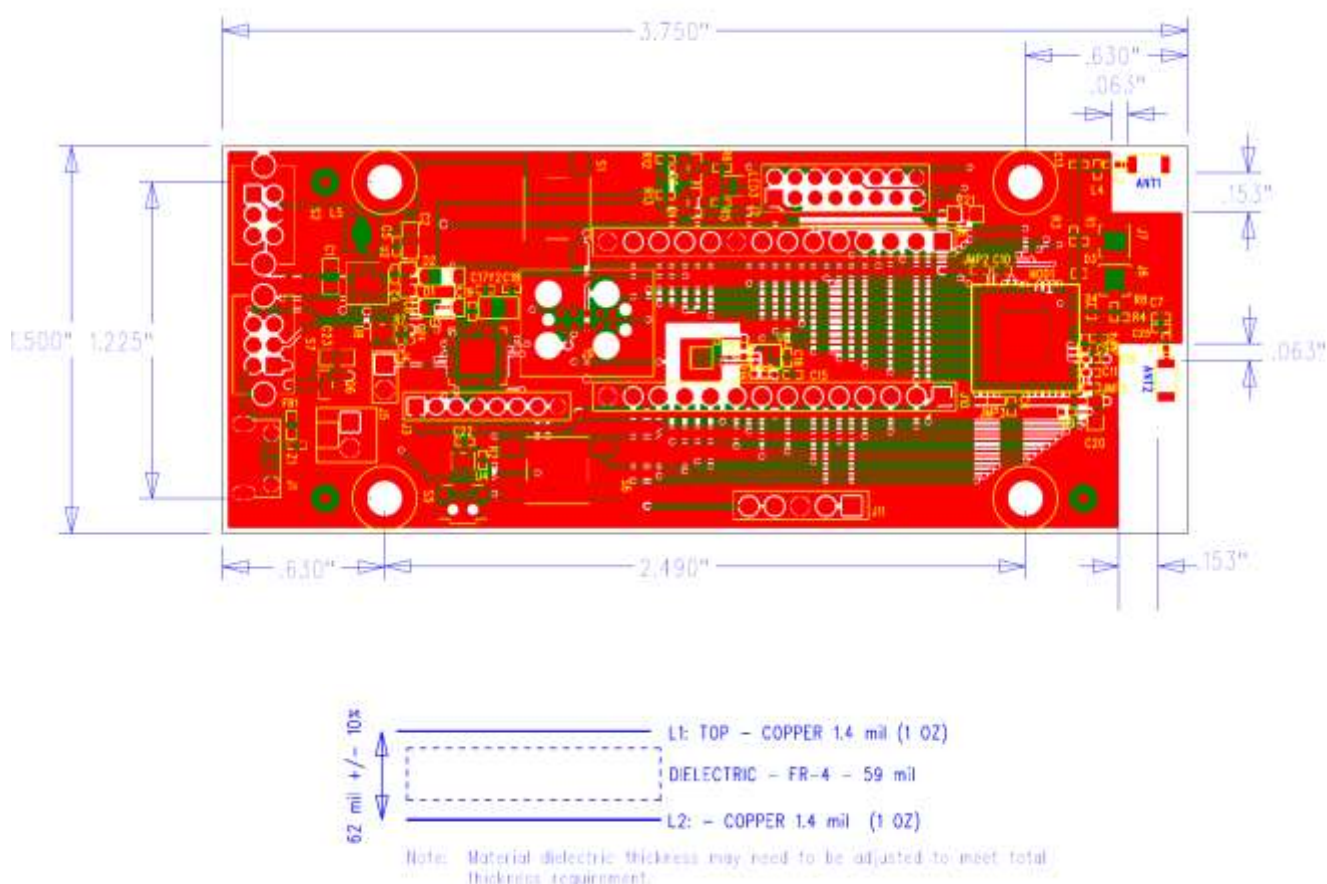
2-Layer Chip Antenna Trace Design PCB Layout
